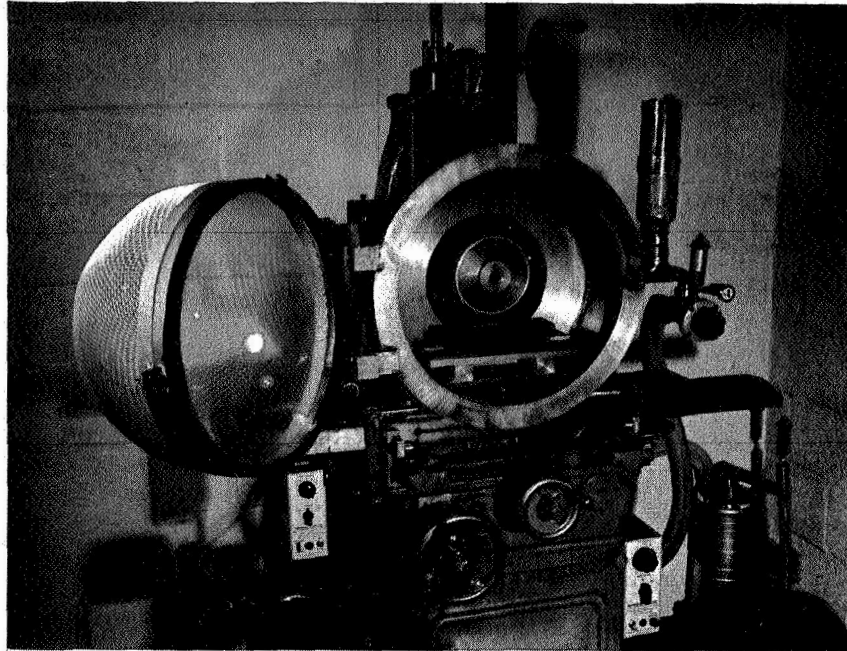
FRONT VIEW OF VACUUM GRINDING SYSTEM
